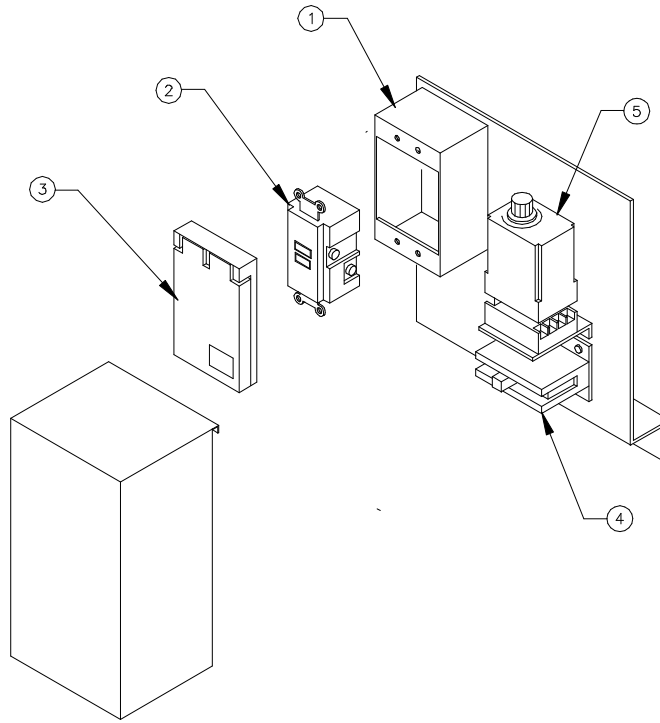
ELECTRICAL ENCLOSURE ASSEMBLY (1992 TO 2000)
